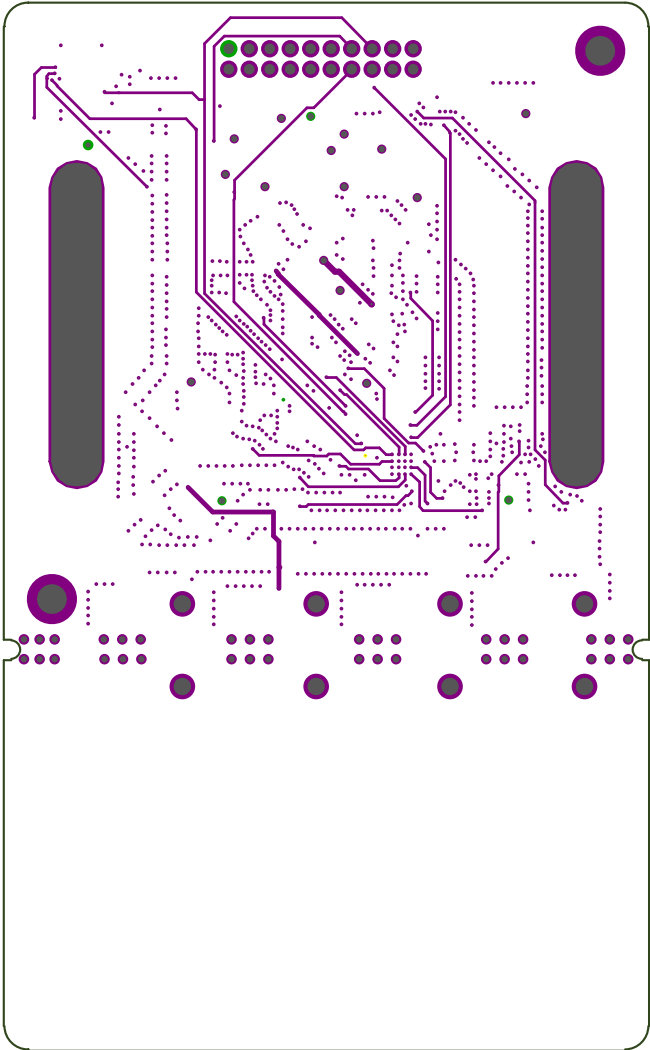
EVAL-ADPD7000Z PCB Layout: Inner Signal
